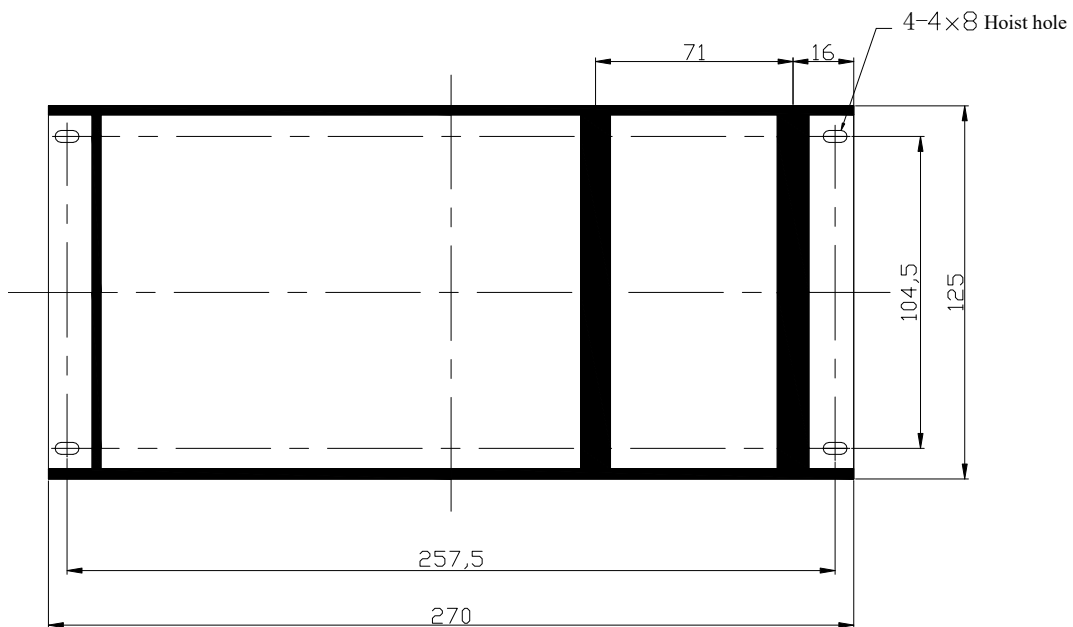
Dimensional drawing of standard combined mounting base plate of car control board
